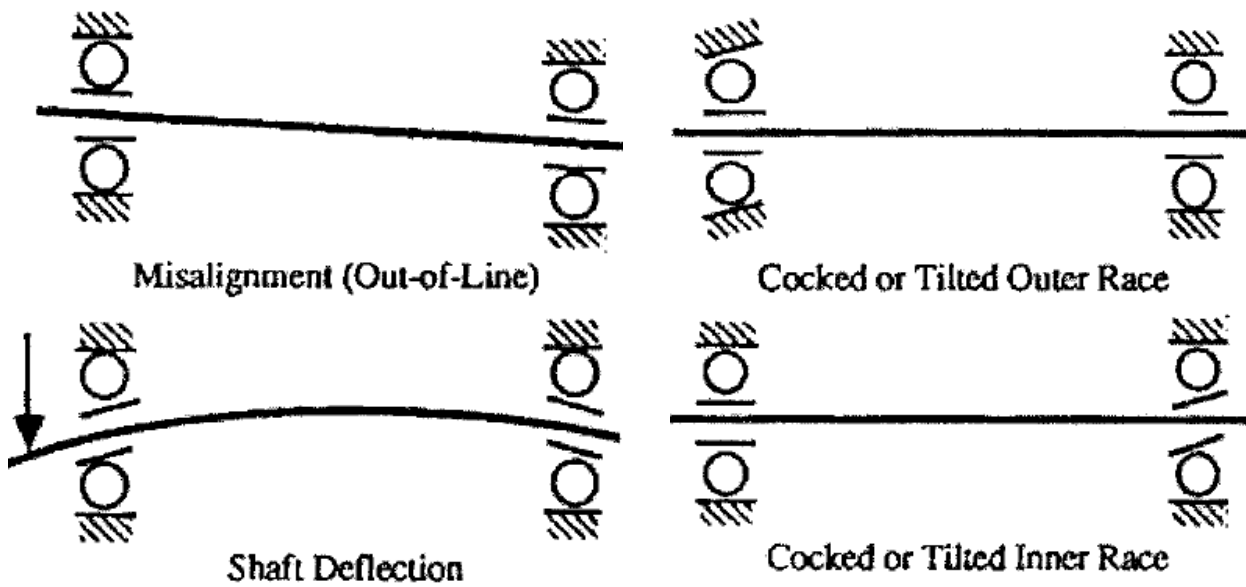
Four types of rolling-element bearing misalignment [41]
